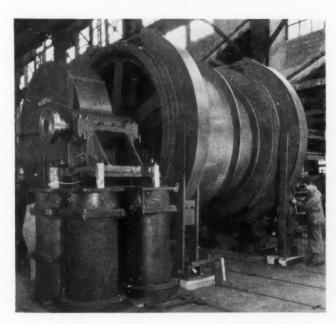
UNDERGROUND MAN HOIST AT LAKE SHORE MINES
